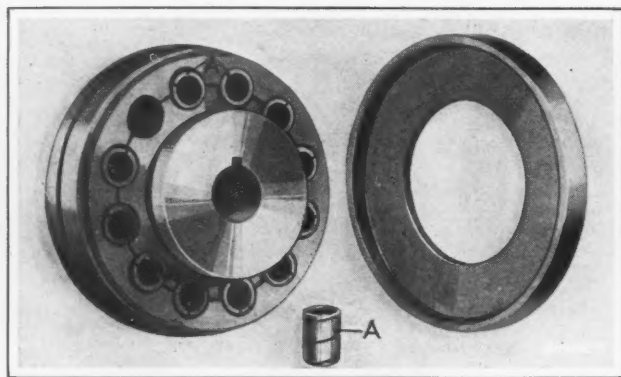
Coupling having Helical Springs mounted in Circular Recess between Internal and External Hubs
